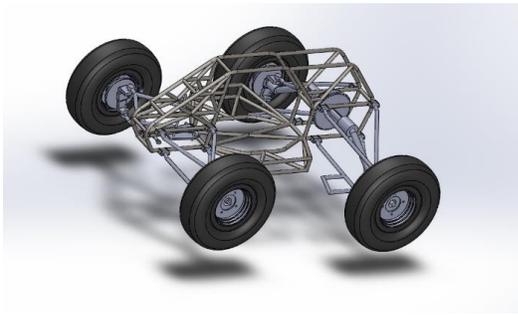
Chassis Assembly of Quad Bike Created on CAD
